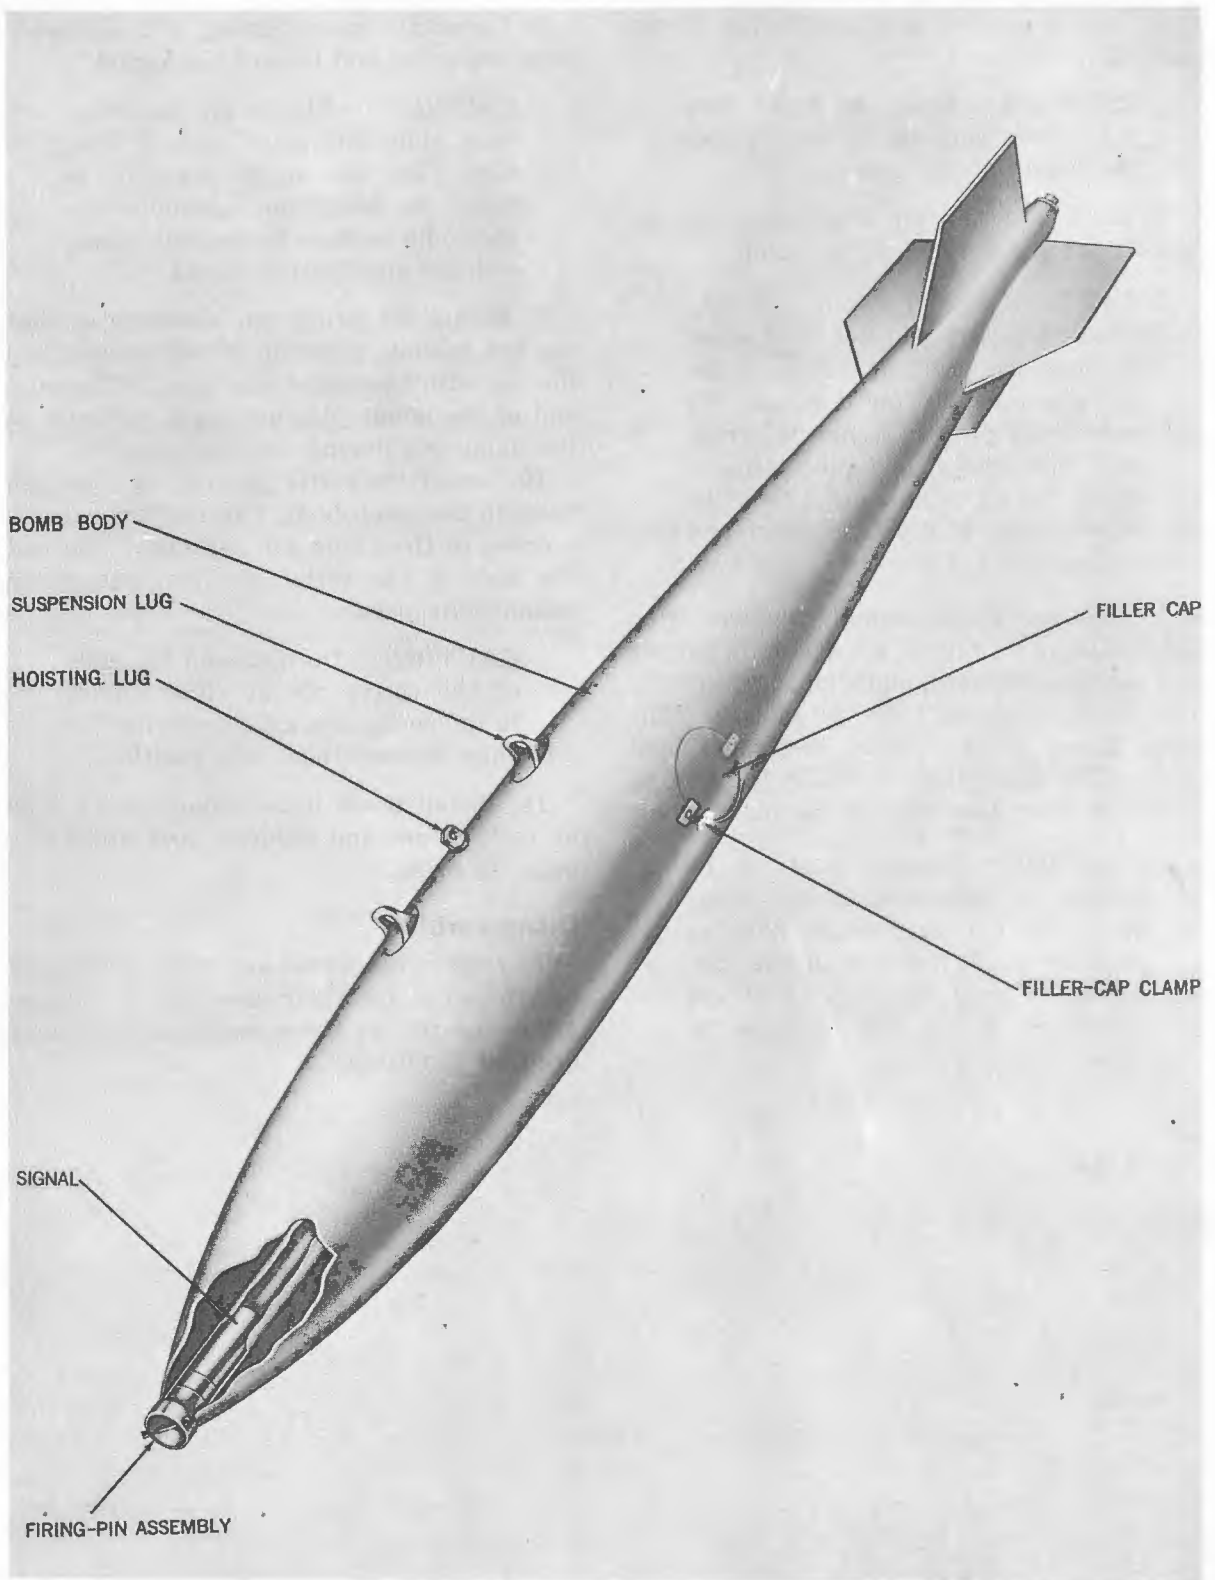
250-lb Practice Bomb Mk 86 Mod 0, Cutaway View.
